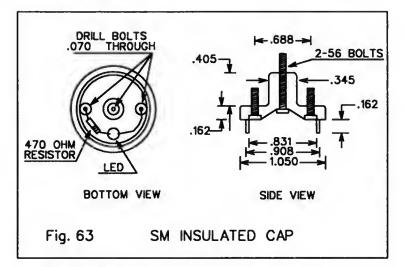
shows the detail for the top. The top is machined from black paper phenolic rod. Change any dimension to fit the size tubing that you use. Drill the 2-56 bolts and lead the coil wires through the bolts. Any color LED can be used in the top. Wire it in series with a 470 ohm, 1/8 or 1/16 watt resistor. Remember that the LED is polarity sensitive, so install it accordingly. Do not forget to drill a No.70 vent hole in the top of the cap. Glue the LED in place with crazy glue (cyano acrylic glue). Solder the bottom in the case. The bottom is nothing more than a metal disk. If you opt for the LED, drill the cap and glue the LED in place. Solder one resistor lead to one LED lead. Cut the remaining two wires short and solder a No. 28 bare wire to them, The No. 28 is much easier to thread through the hole in the 2-56 bolts. The positive wire of the LED must go to the Positive wire of the coil and the positive terminal in the cap.
